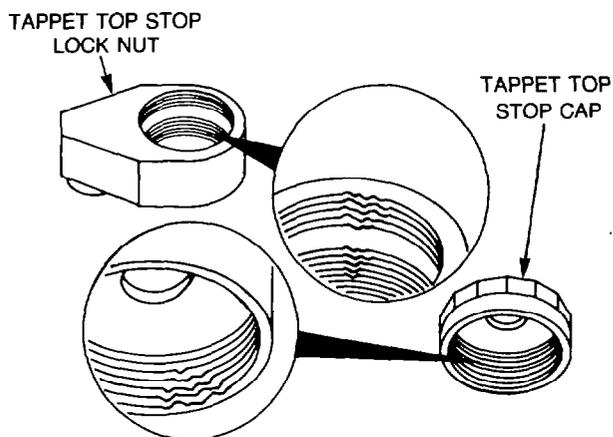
Tappet Top Stop Cap and Lock Nut — Inspection
